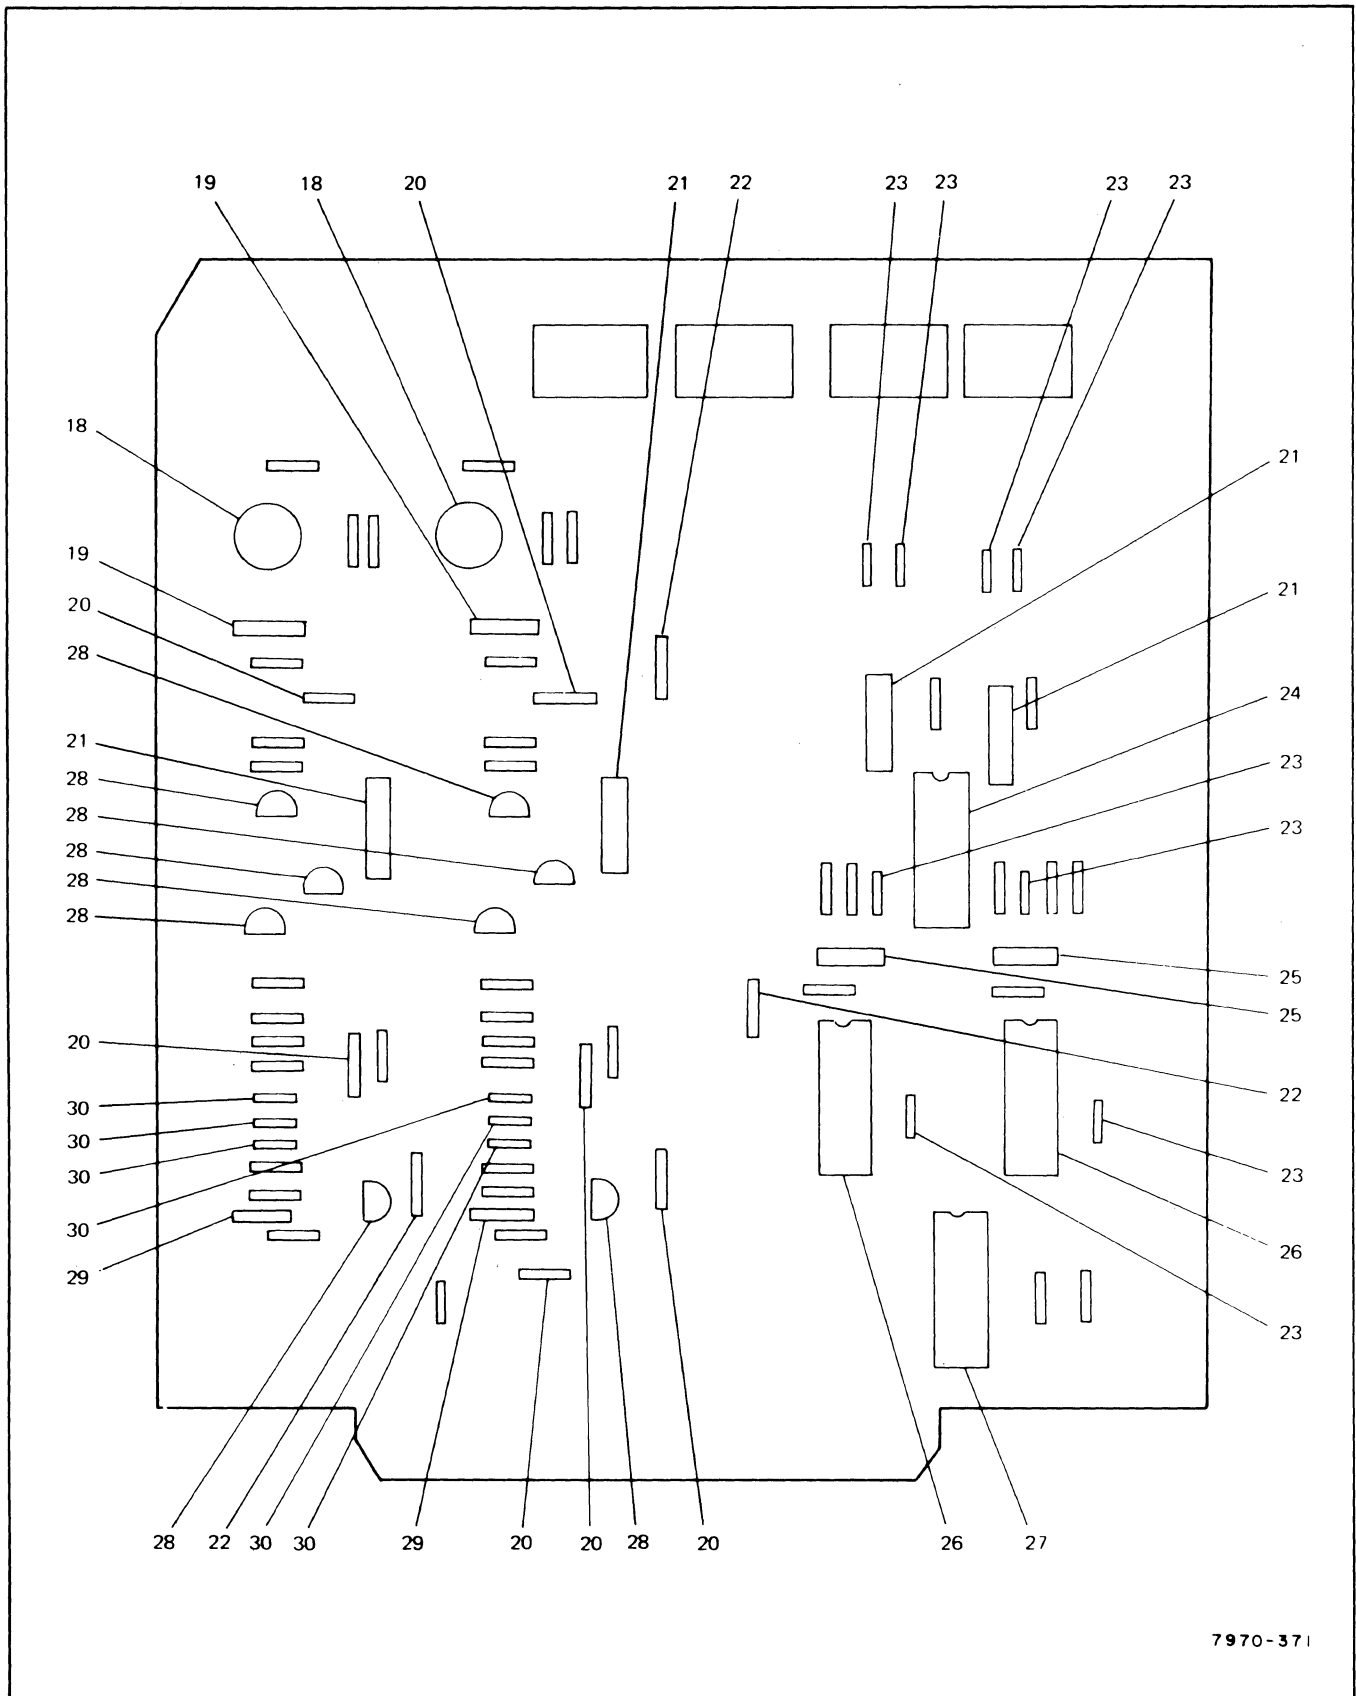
Dual-Channel Read Data PC Assembly (10 - 20.9 IPS) (Sheet 2 of 2)
